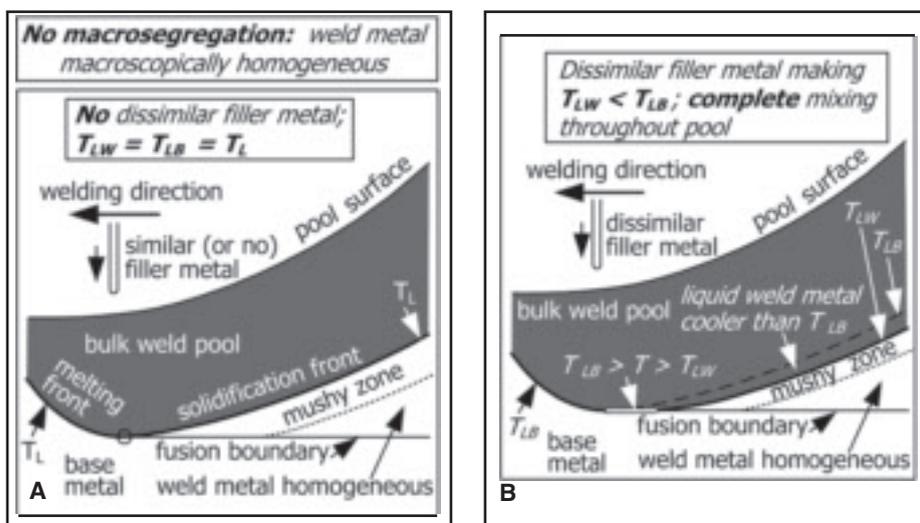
Absence of macrosegregation: A — No dissimilar filler metal; B — dissimilar filler metal makes $T_{LW} < T_{LB}$ but mixing is complete throughout the weld pool. Pool boundary is melting front before circle and solidification front after.
